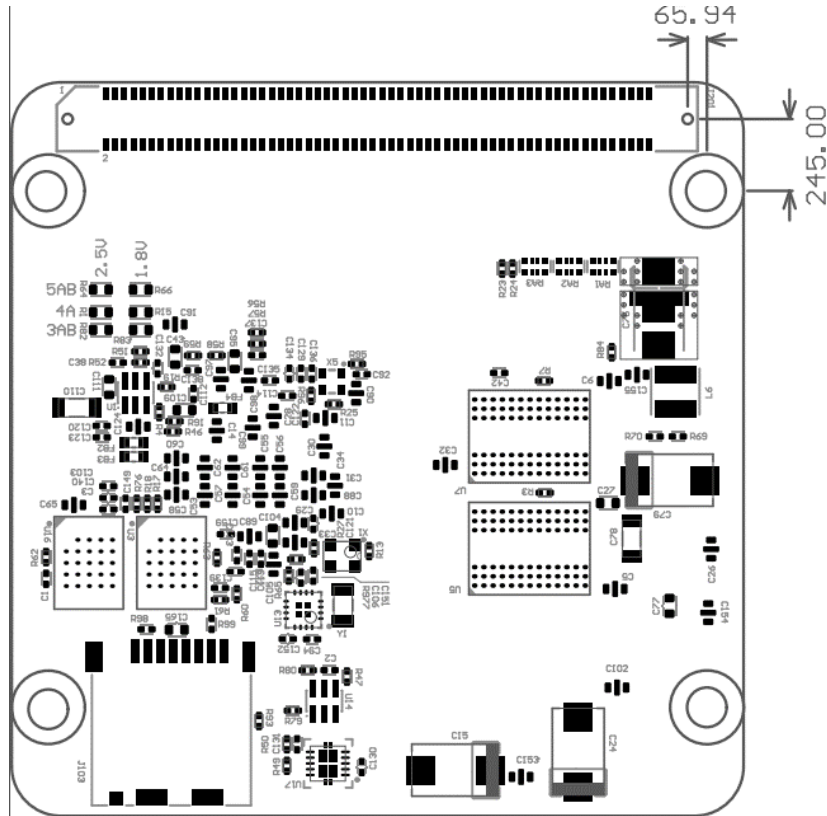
MitySOM-5CSx-DSC Mechanical Outline, View from Bottom
